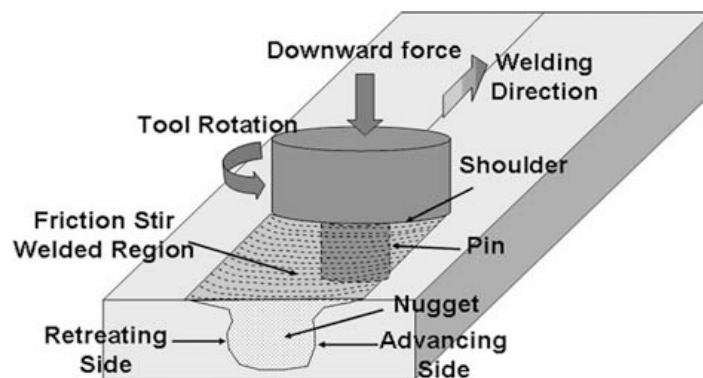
Schematic view of Friction Stir Welding [6]
